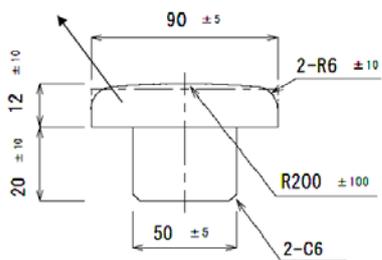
Shape of the rivet and the tolerance (unit μm).
